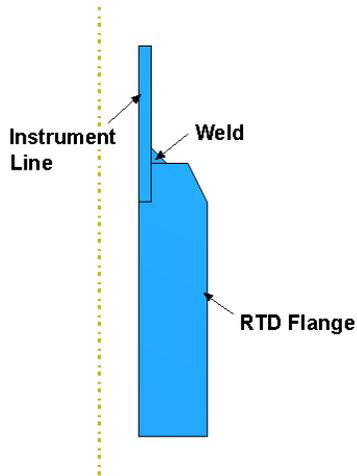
Simplified axisymmetric model for connection of instrument-line-to-RTD-flange weld
